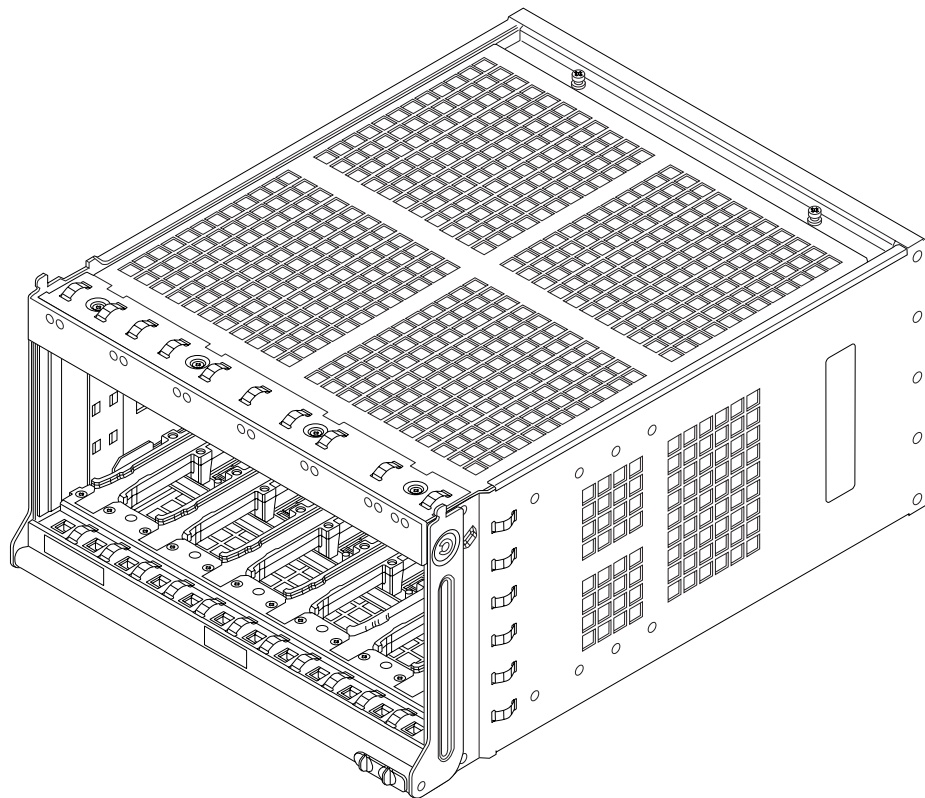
Disk Drive Chassis (no drives fitted)
